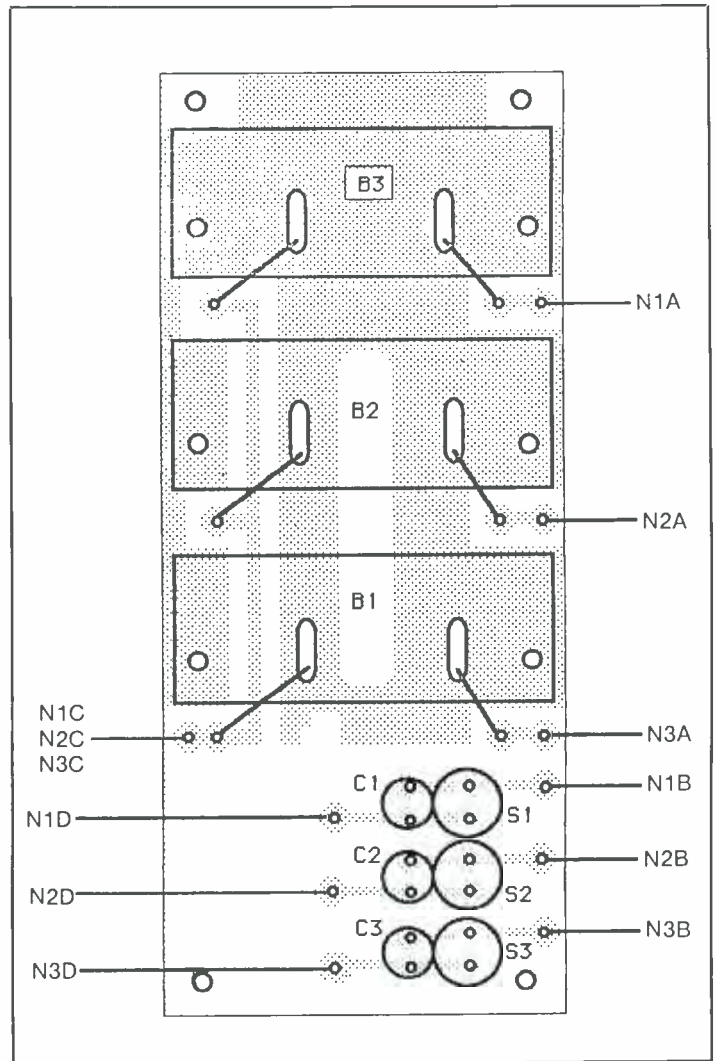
Actual-size etching-and-drilling guide for control circuit's printed-circuit board.
